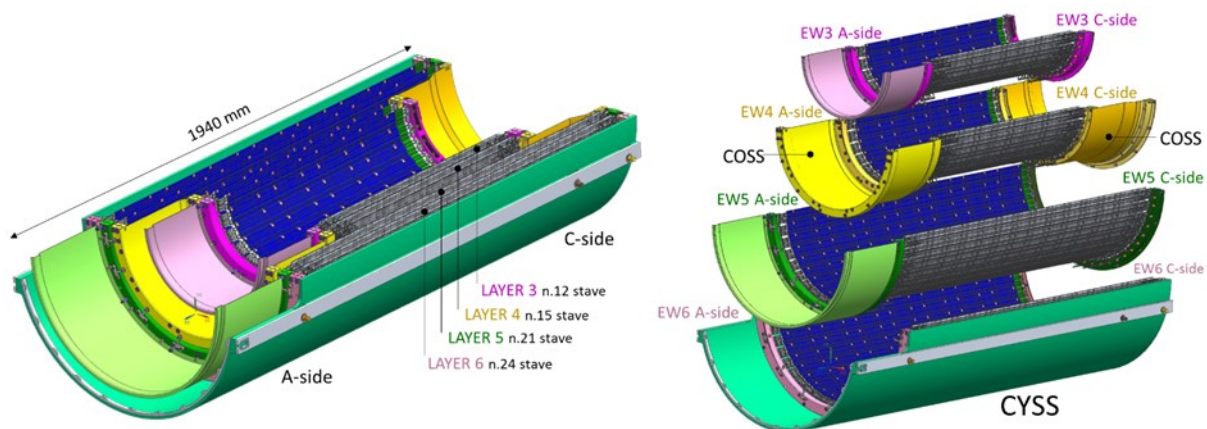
Outer Detector Barrel assembled and exploded [12]
